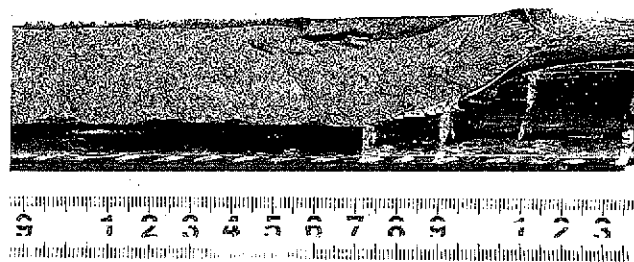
Fracture and appearance of welded-joint brittle crack propagation test specimen in vicinity of crack arrested point
